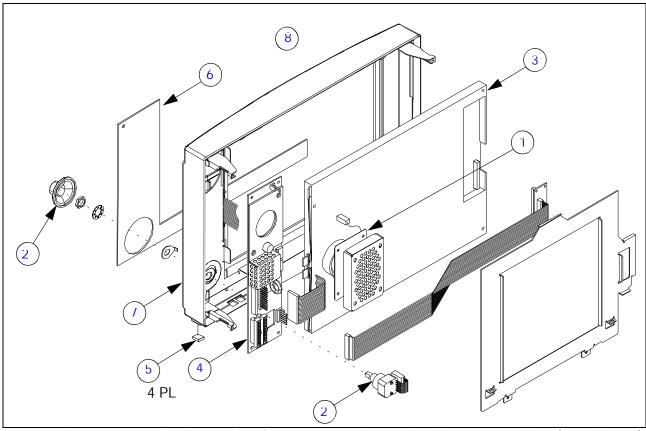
SC9000 Front Panel Subassembly w/ 10.4" LCD Display - Replaceable Subassemblies - (see Table A-1).
